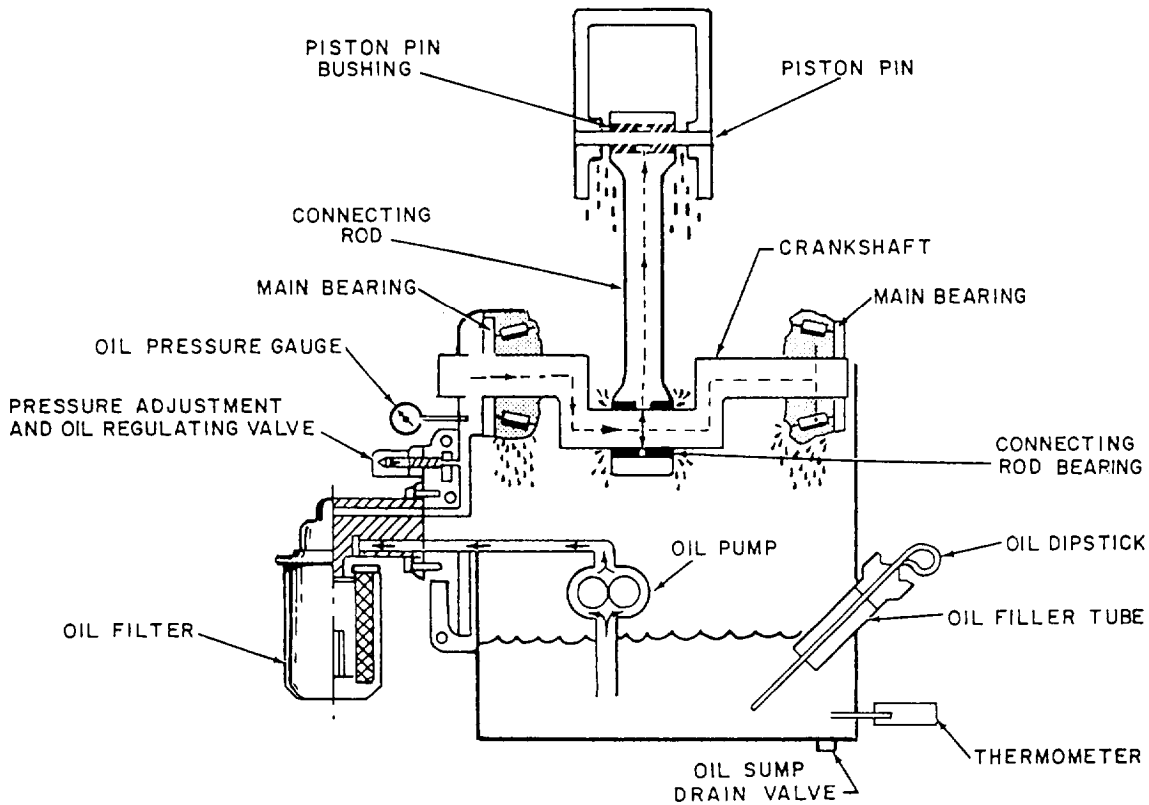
Pressure type of lubricating system on a reciprocating type of air compressor.
